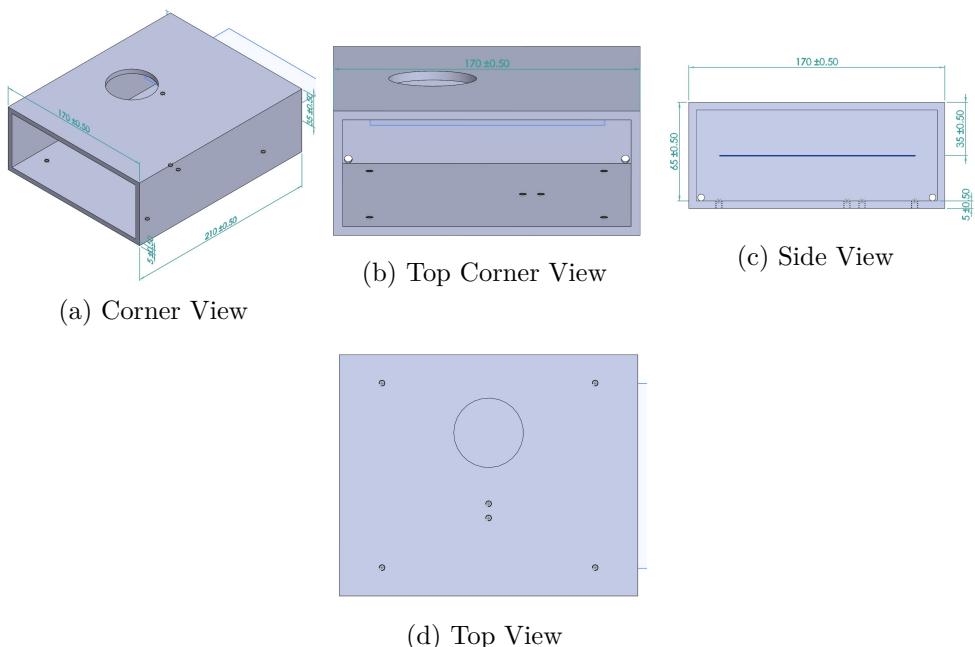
Rough Solidworks Drawing of the Mechanical Enclosure
